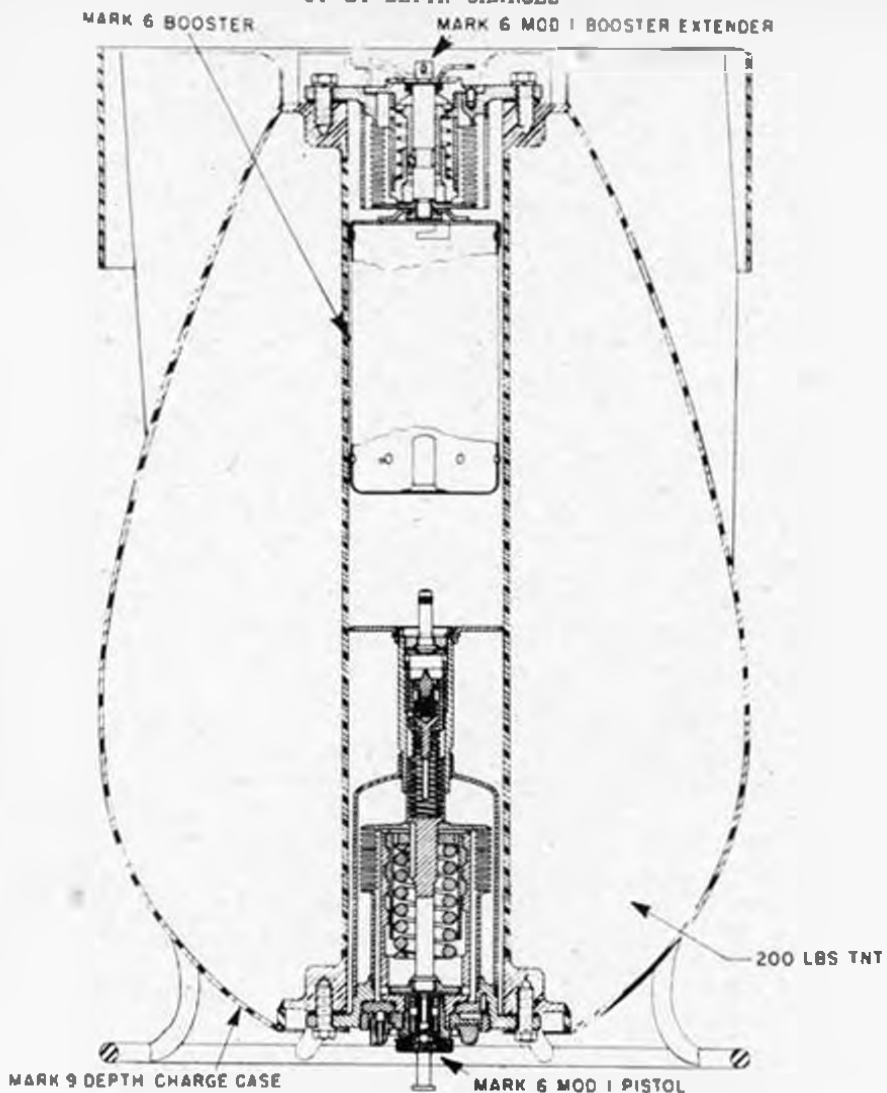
Mk. 9 Depth Charge with Mk. 6-1 Pistol and Booster Extender, Sectional View
